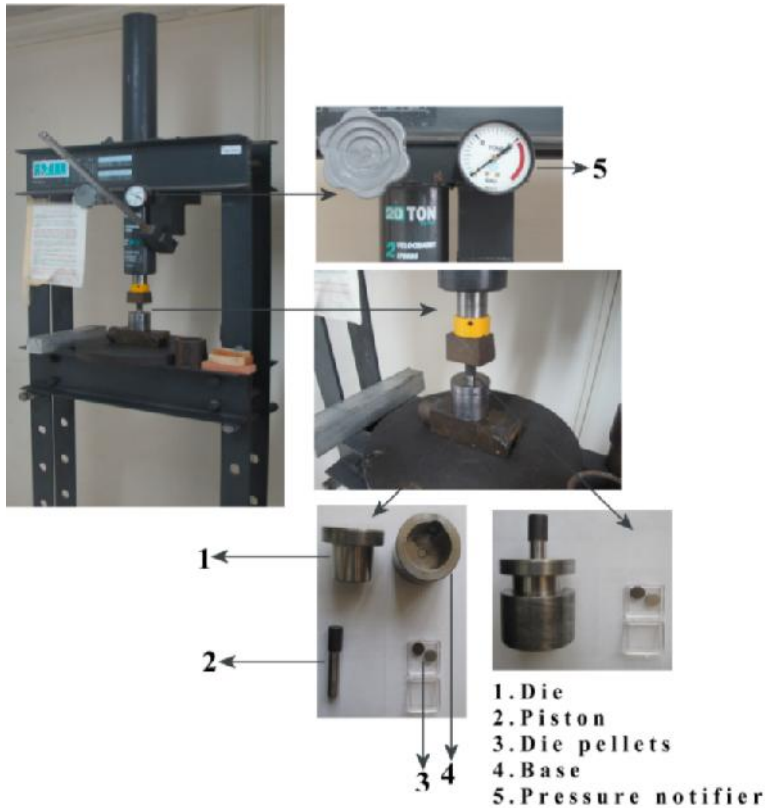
Manual pressing machine for manufacturing the pellets.
